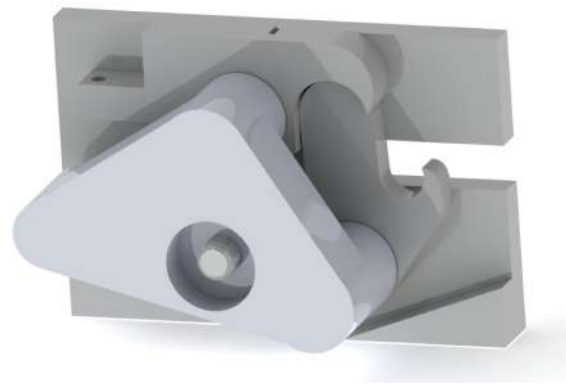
Isometric view of the Cable Actuated Continuum Disk Mag-lock design in its closed configuration.
